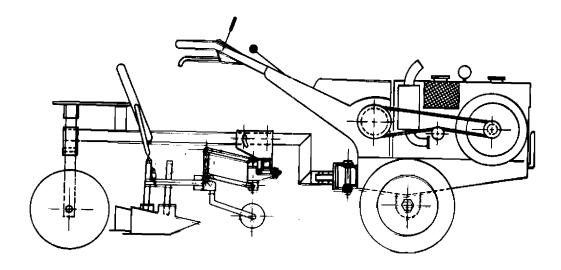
Multi-purpose toolbar with seat and wheels fixted to a two-wheeled tractor (After Rhebergen, 1976)
